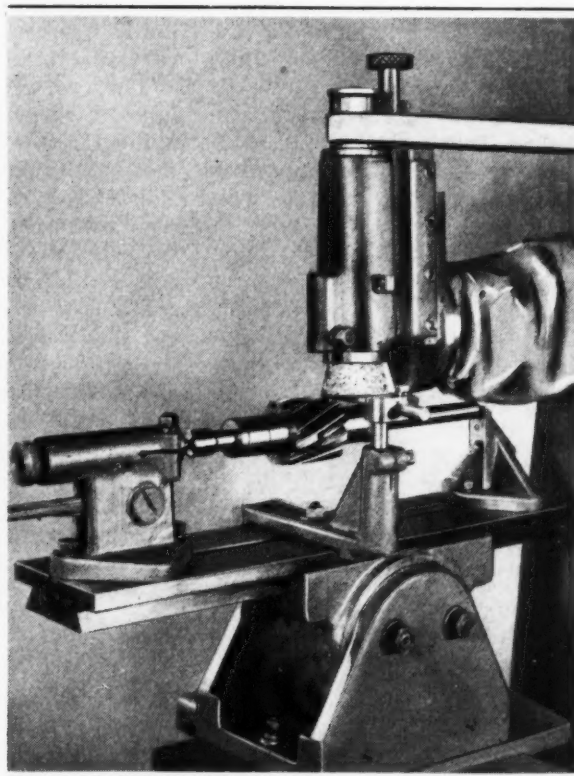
Grinding a Helical Milling Cutter by Holding the Wheel in One Position and Moving the Cutter
